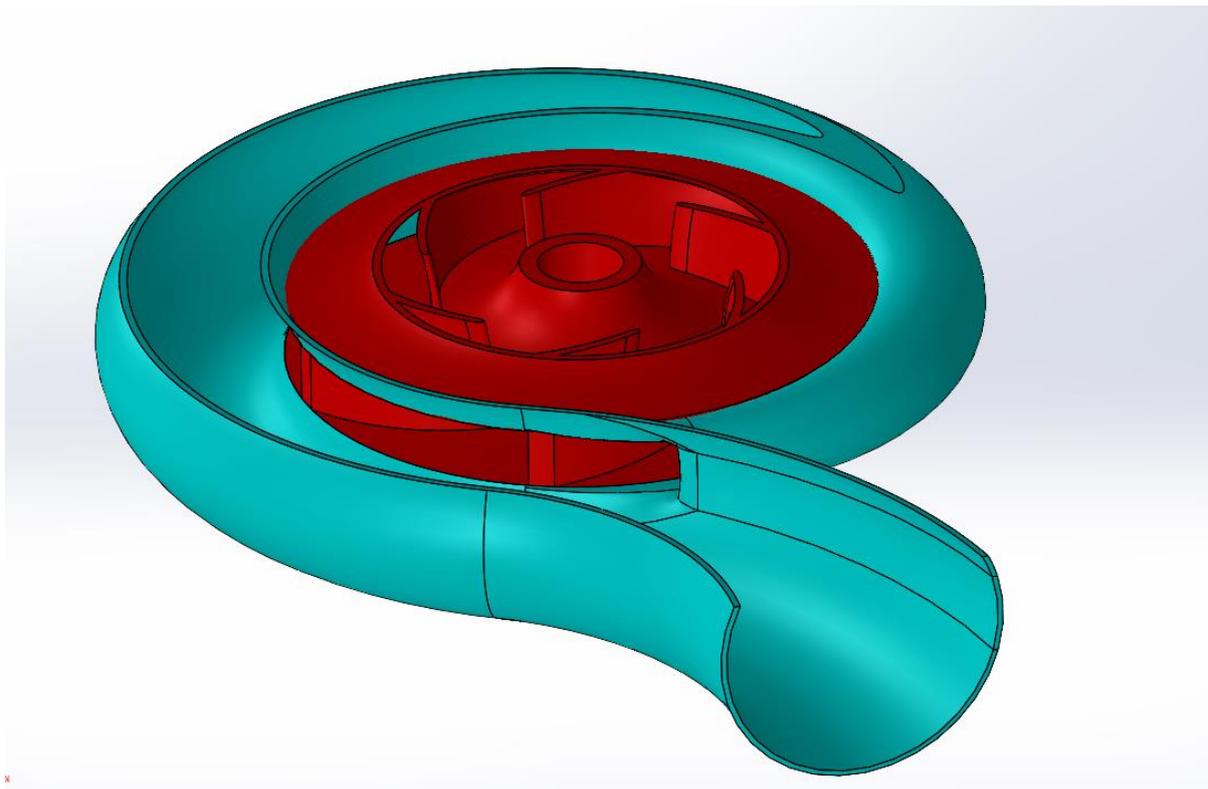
Cut view of the housing and impeller generated by CFTurbo in SOLIDWORKS
